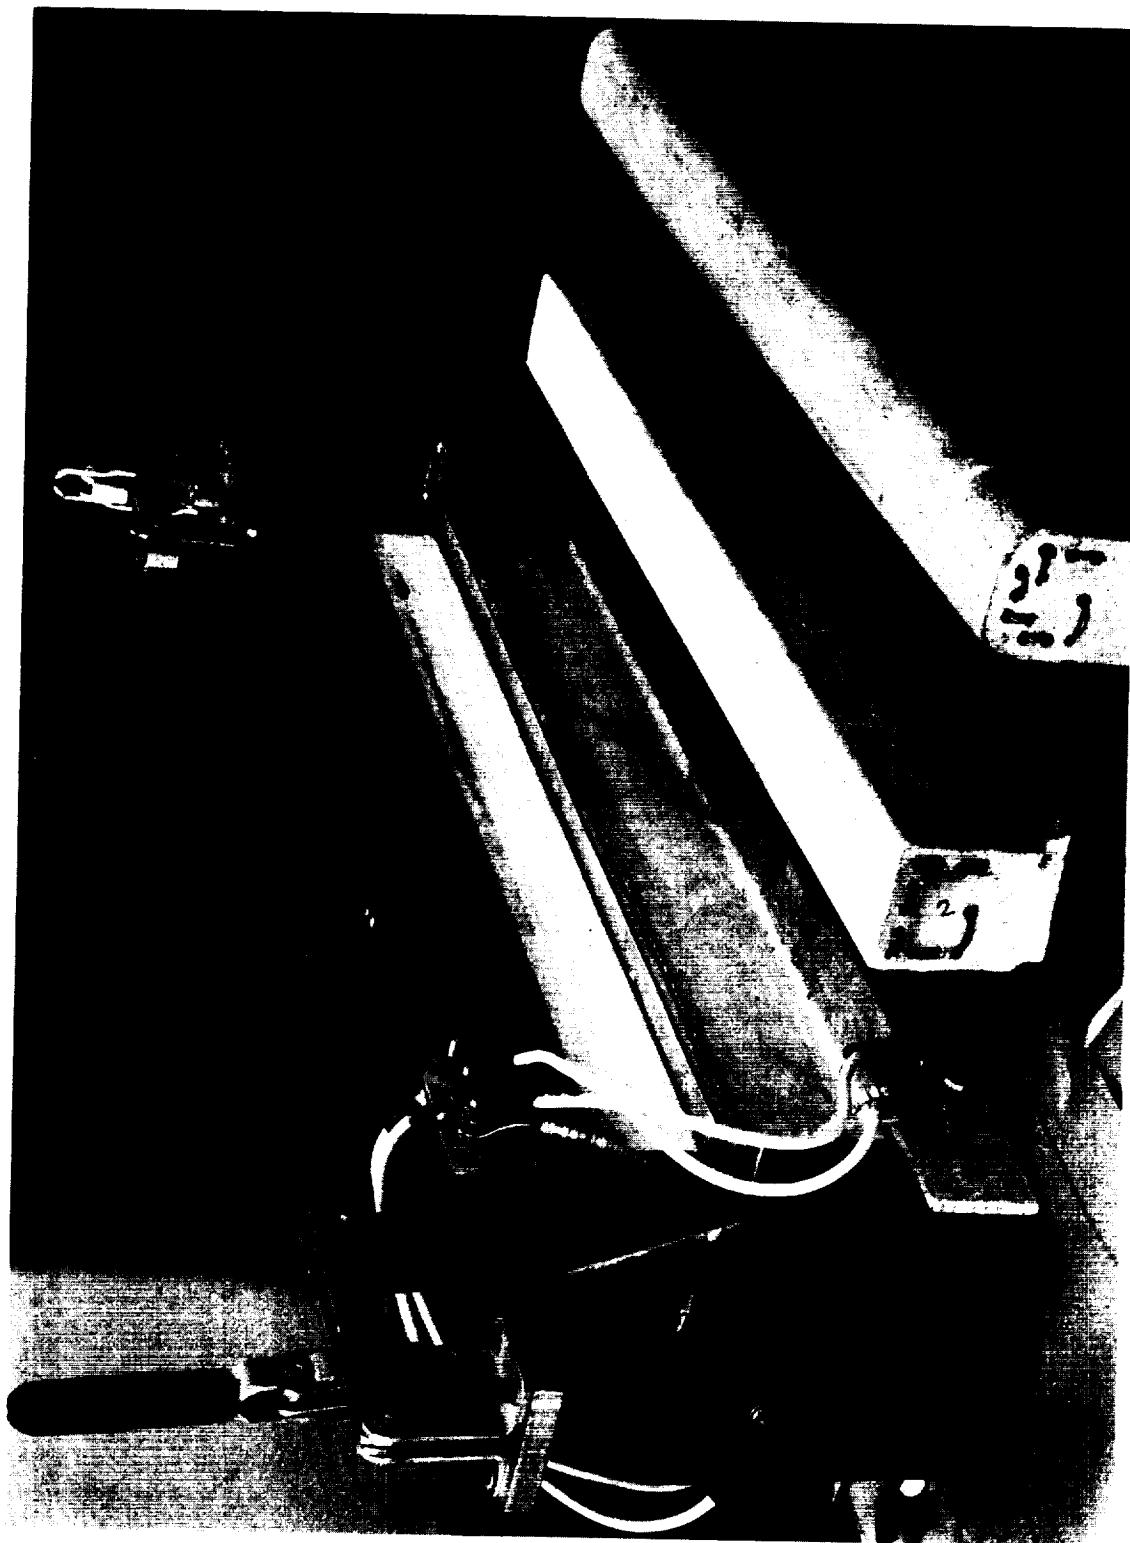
LEAF BRAKE DIE WITH 0.10-INCH AND 0.60-INCH RADIUS DIE BLOCKS .
